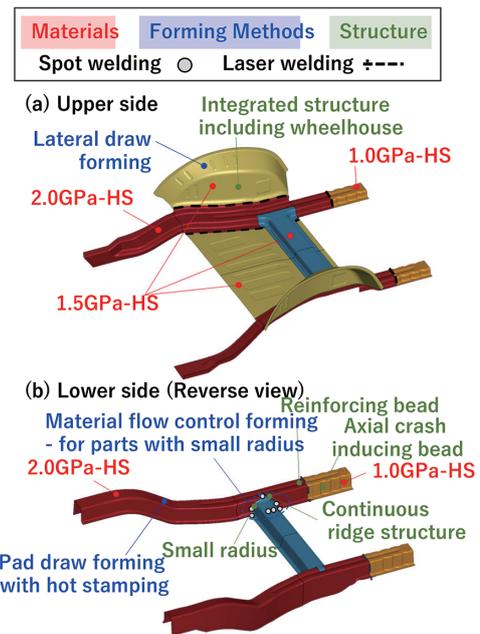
Integrated rear under module concept with large-scale hot stamping
